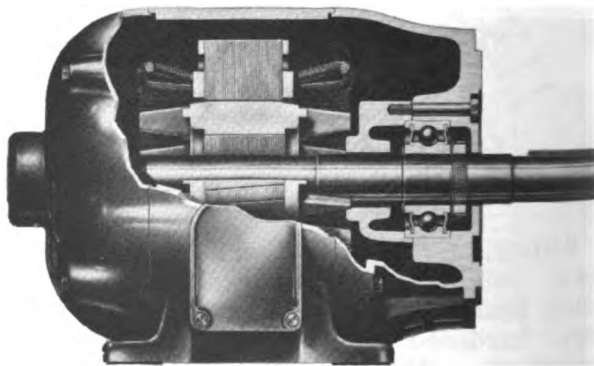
Motor equipped with permanently lubricated ball bearings.
